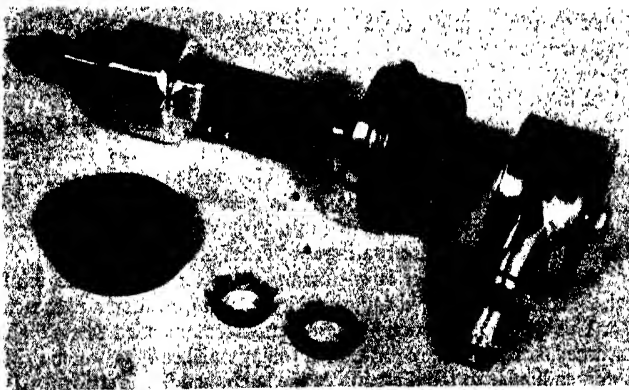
AN AIR-TURBINE HAND-GRINDER WITH THE TOP REMOVED TO SHOW THE "TUFNOL" ROTOR, WITH THE ROTOR AND BALL-RACE CAGES SHOWN SEPARATELY
